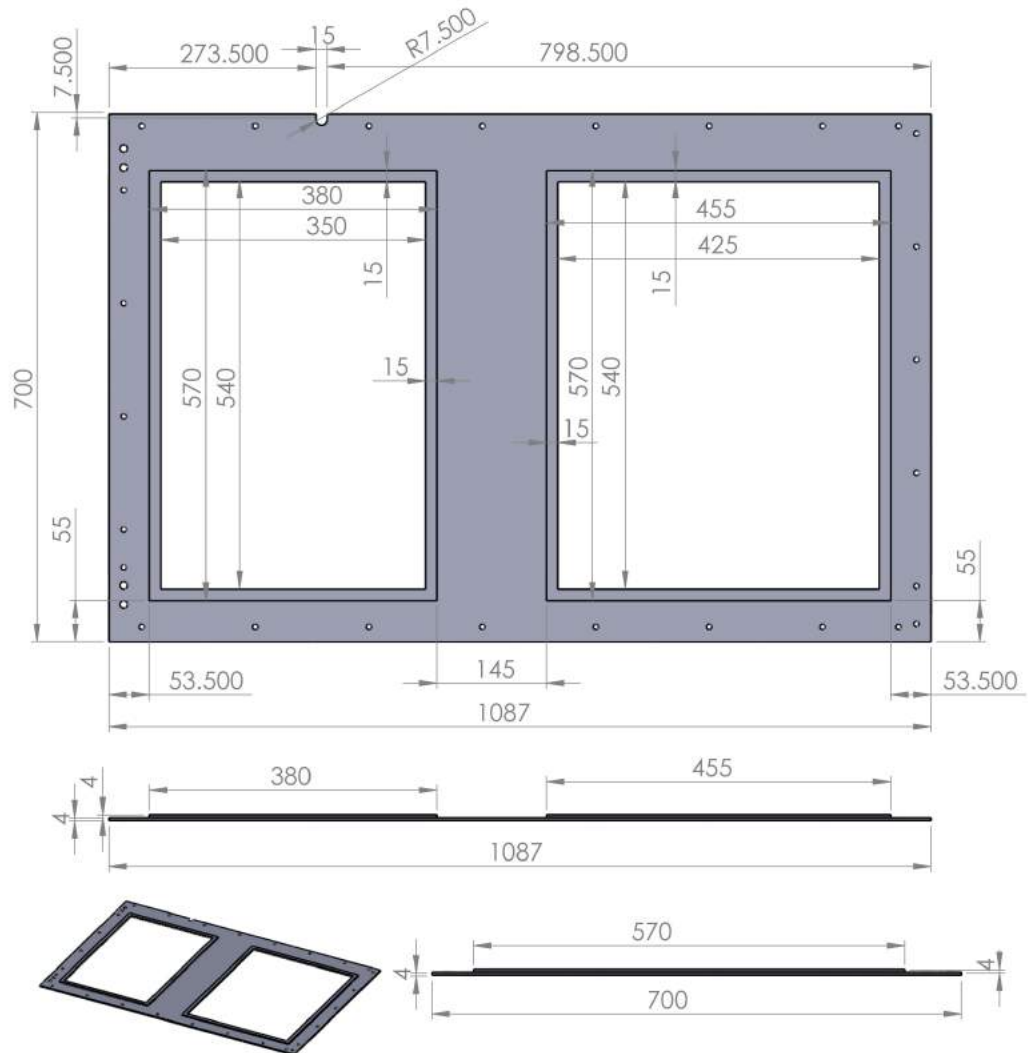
Inside view of Panel 1 which shows the frames on the inside of the windows into which the access panels shown in Figures B.6 and B.7 fit in order to complete the cage without falling through in addition to providing a point at which the latches can grab onto the main panel. It is best to attach these inner frames using rivets as welding was shown to warp the panel to such a degree that the access panels would no longer fit. One can also see a small R7.500 slot cut into the side of the panel which allows DC cables to enter the cage.
